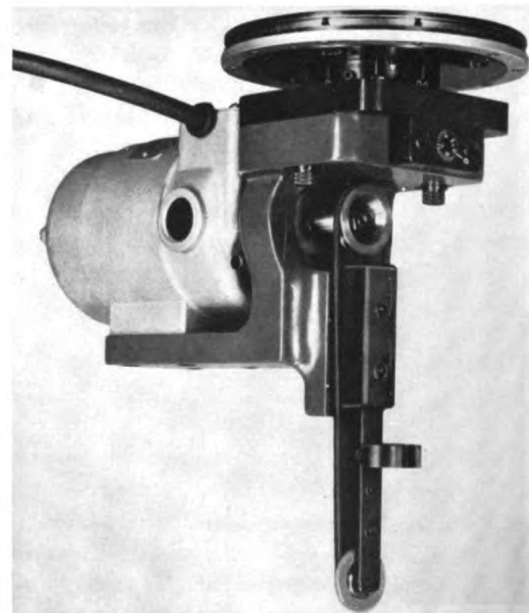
Rotatable mounting ring of "slot grinder" permits angular orientation of wheel axis to outfeed travel.
